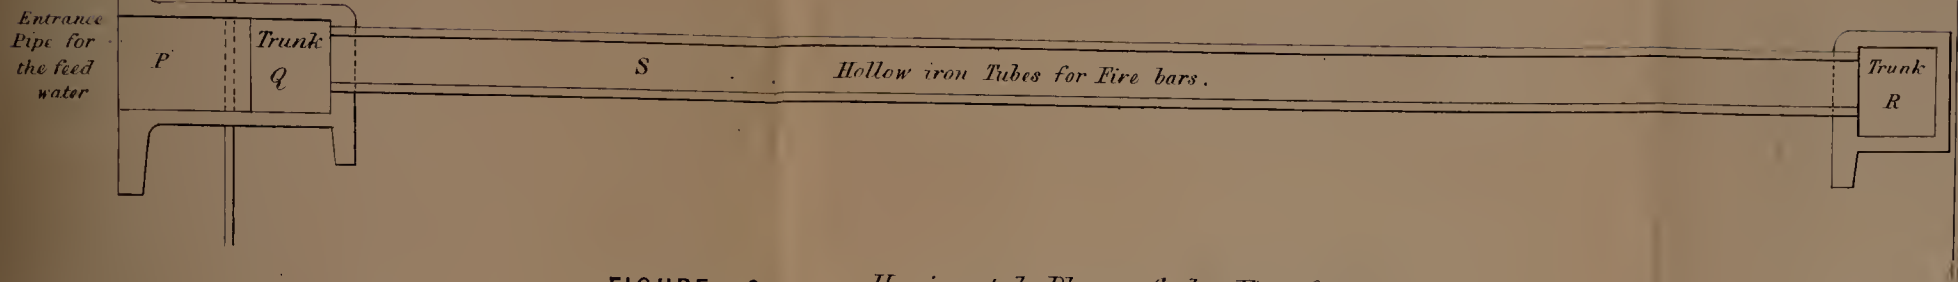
Horizontal Plan of the Fire Grate.
